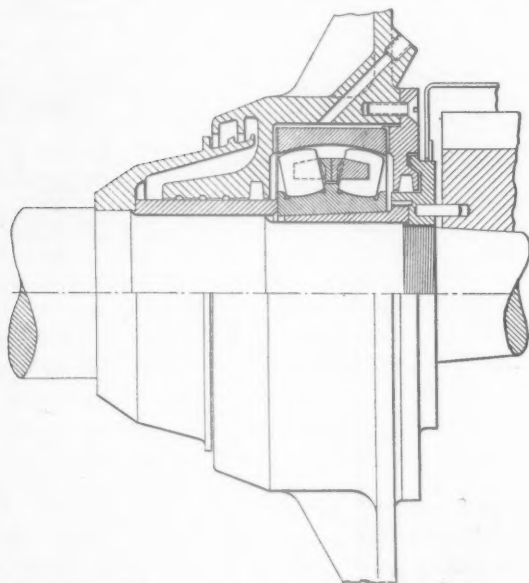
Spherical Roller Bearing Applied to Motor Armature Shaft
